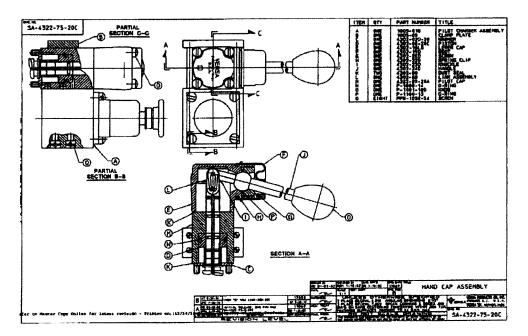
Engineering Drawing of Versa Valve Part No. VGK-4523-20C-D0
